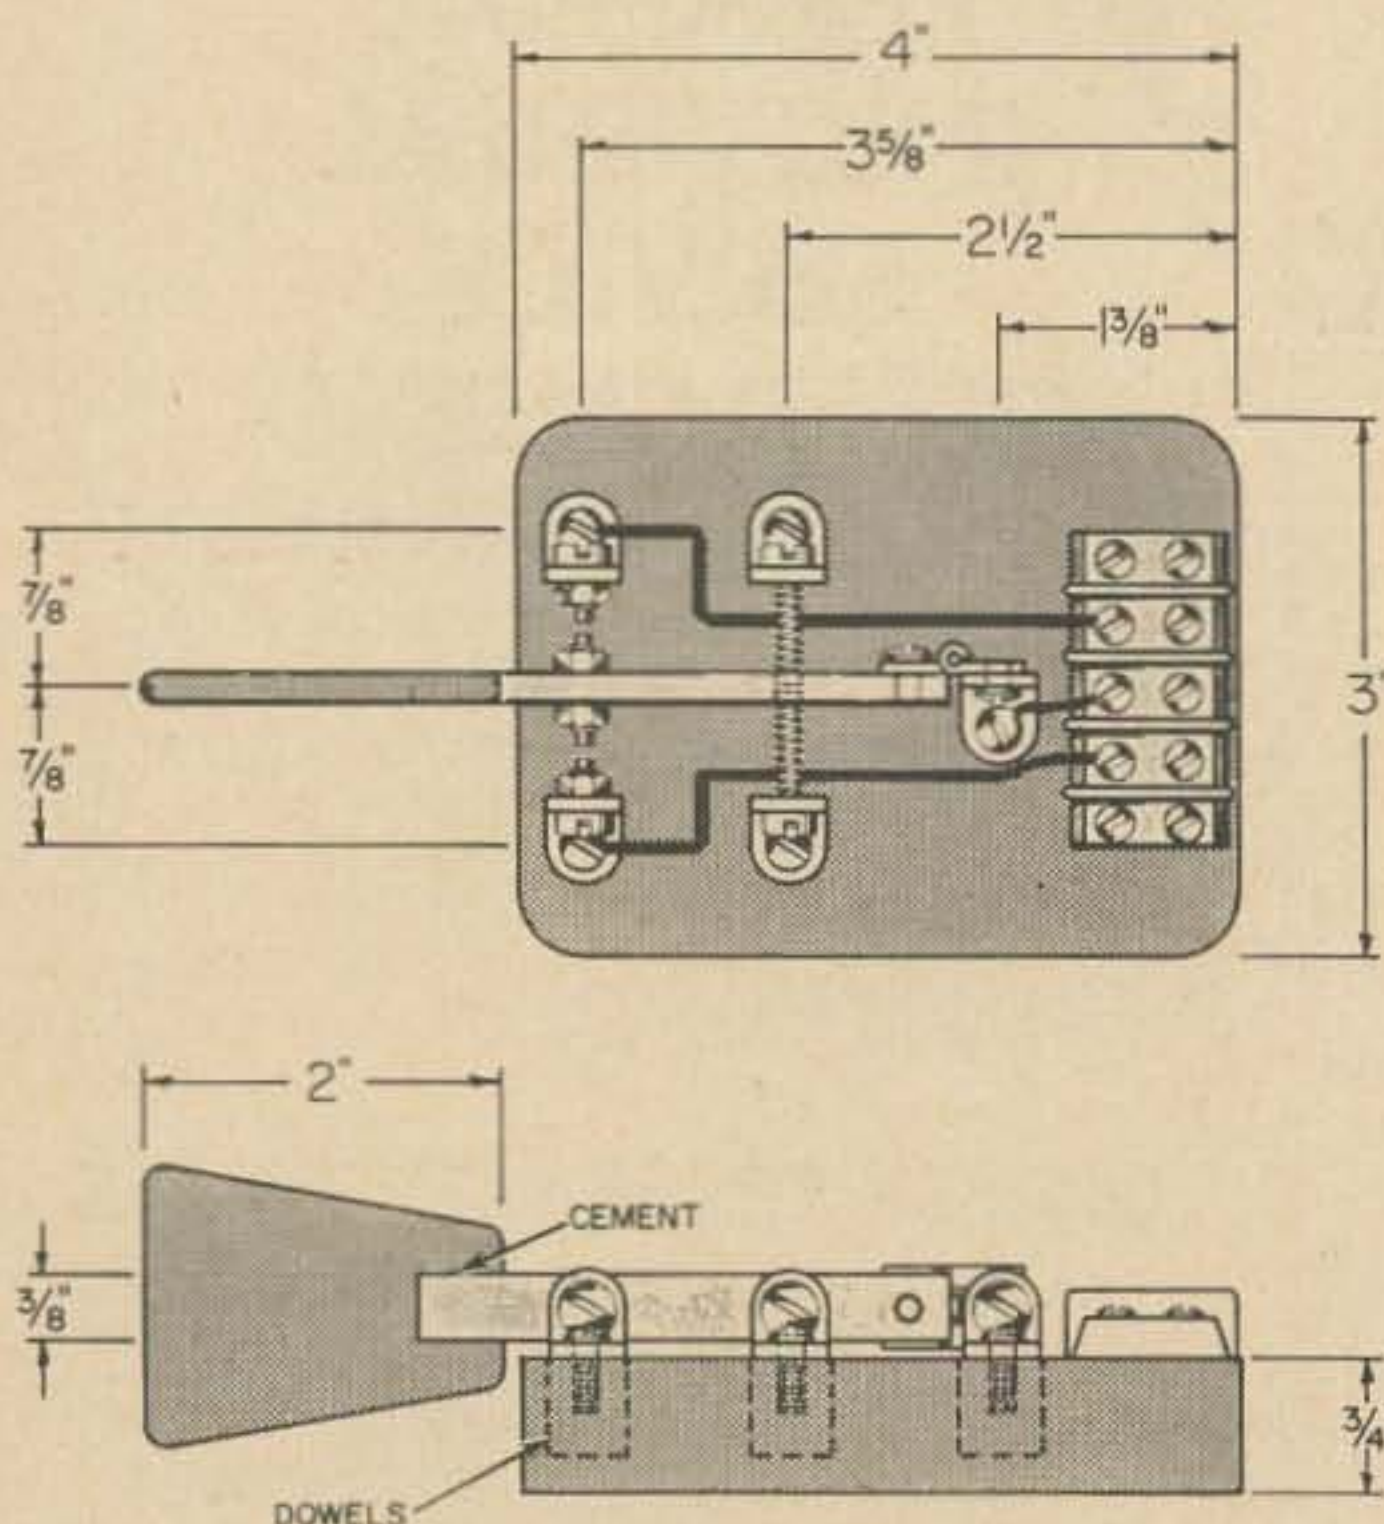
W6BLZ's sideswiper for electronic keyers. The base is made from lead molded in a sardine can.
